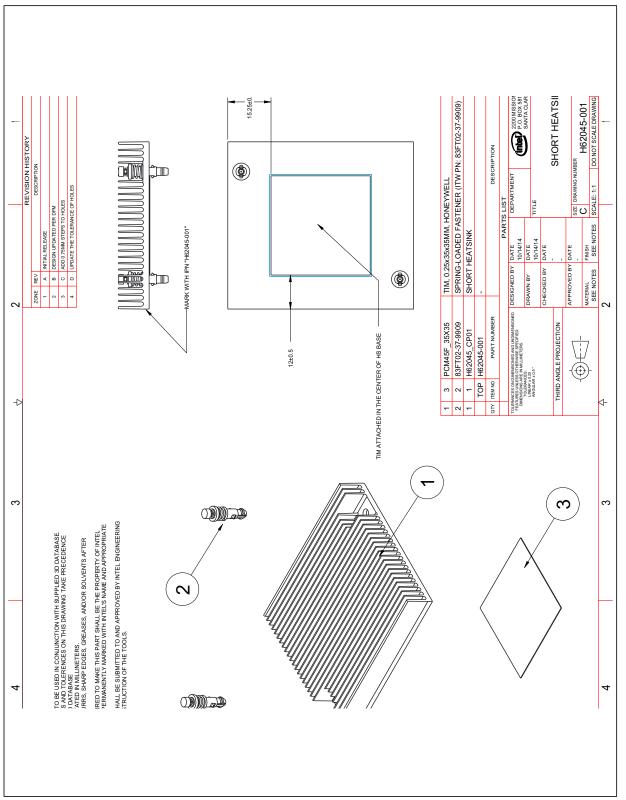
H62045 - Reference Heatsink Assembly Drawing - Sheet 1 of 2
